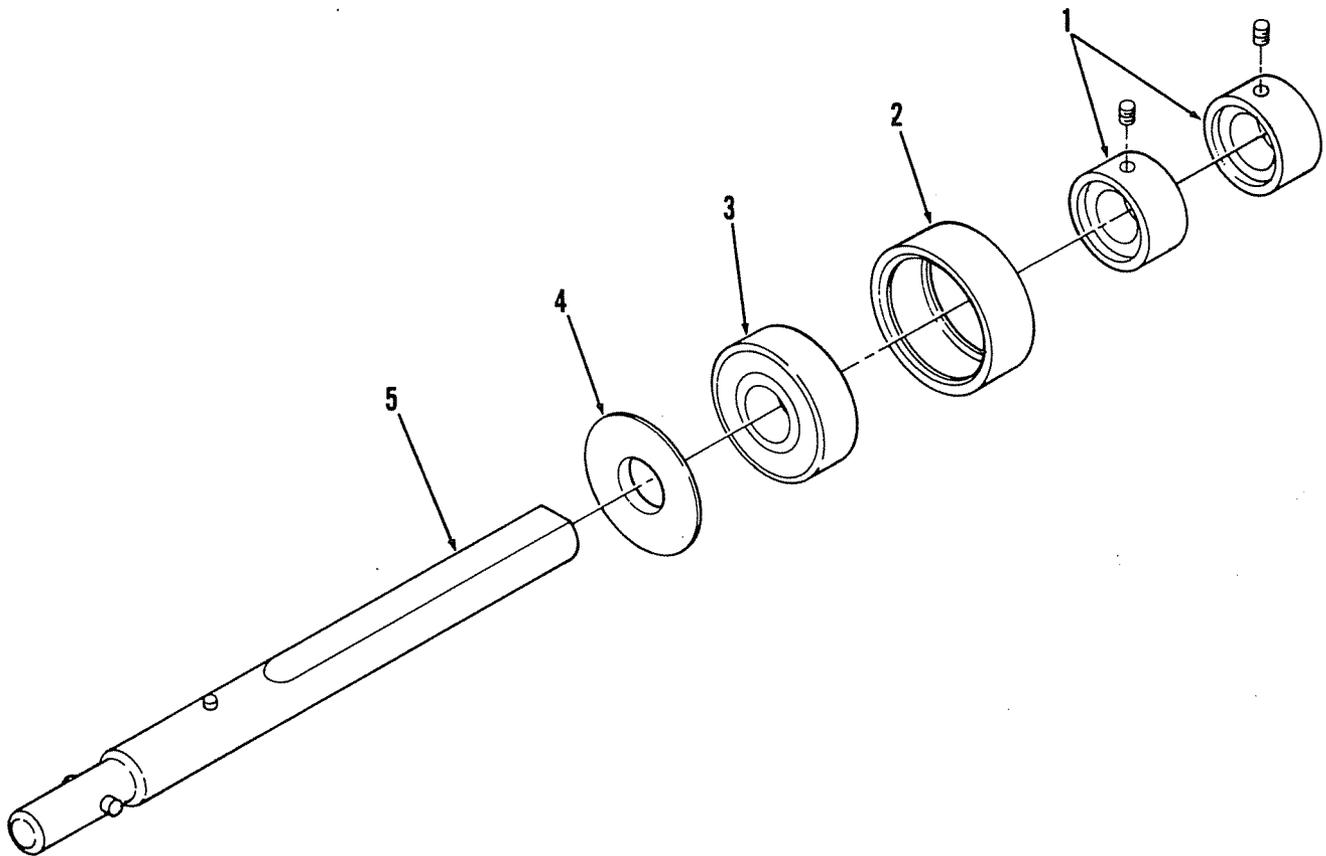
BEATER DRIVE SHAFT ASSEMBLY
